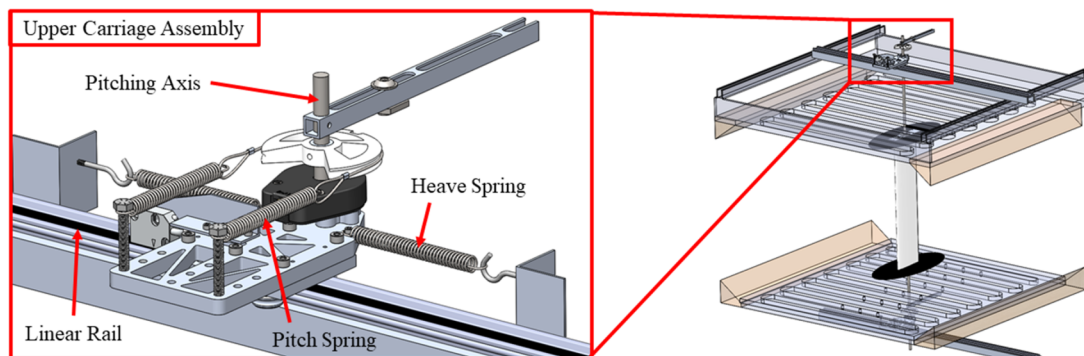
CAD mockup of the aeroelastic wing apparatus highlighting the upper carriage assembly.
